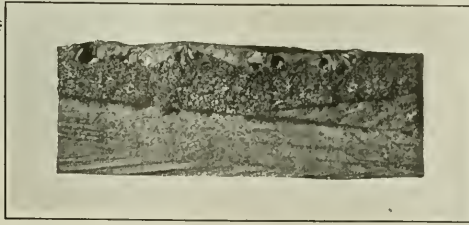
Structure of Cast Iron welded by the Carbon Arc Method
